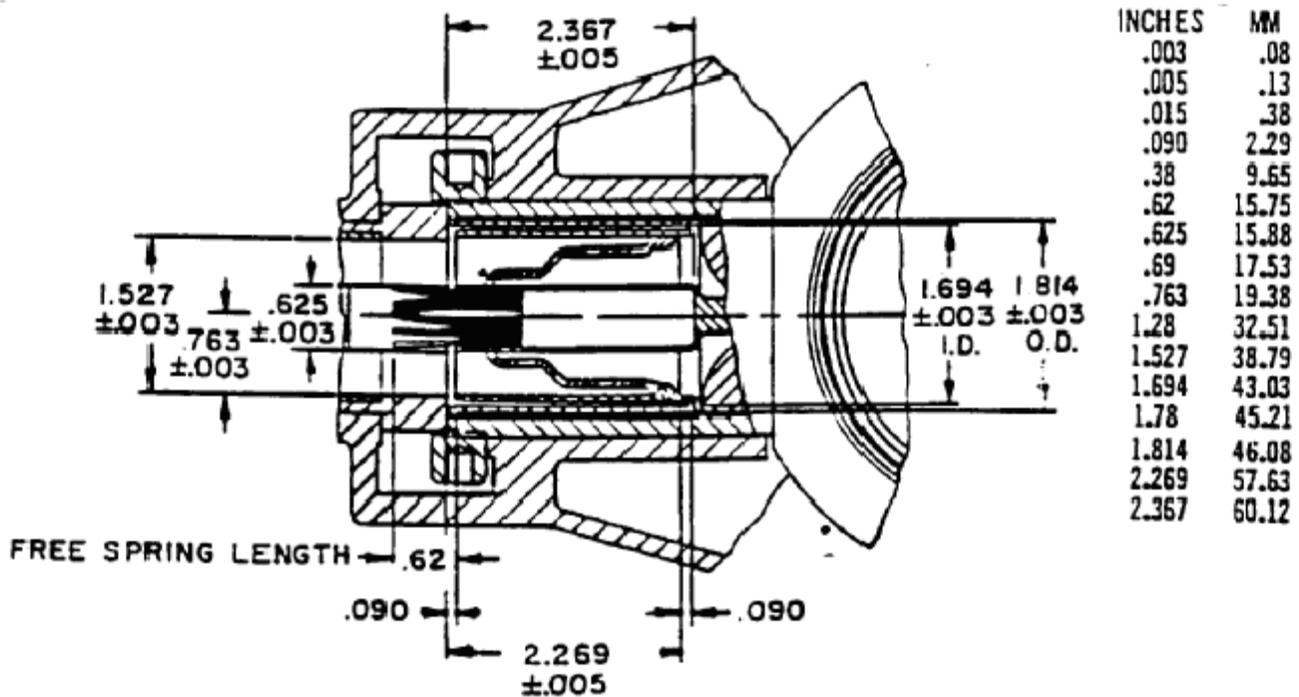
Outline drawing of electron tube 5:26 - Continued.
